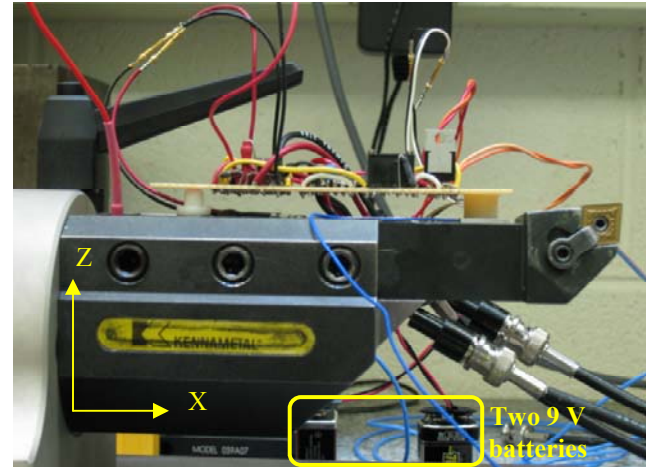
SIDE VIEW OF SENSORS ON TOOL
